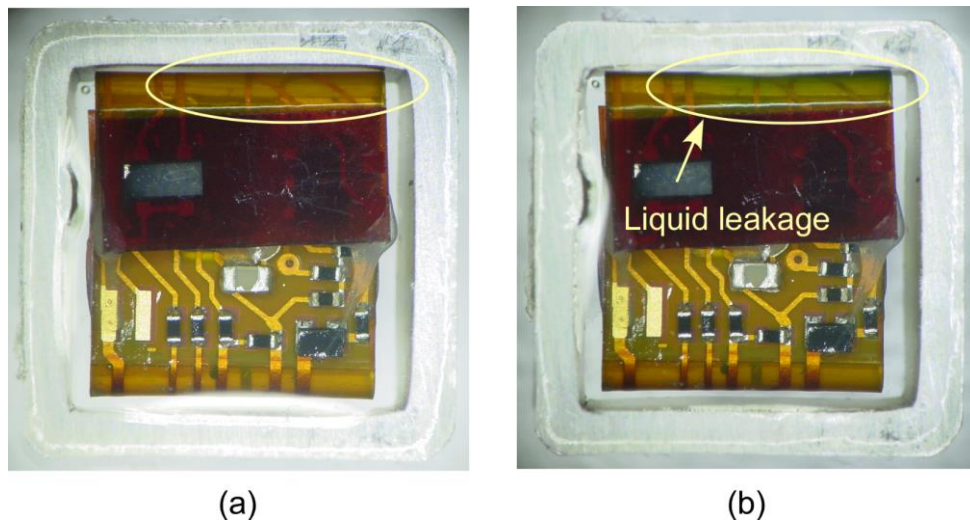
Leakage path in package with PDMS filler at where ELM stack touches tube. Photos of a package with PDMS filler: (a) before any test; (b) after pressurized at 50 MPa for 1 h in DI water with blue dye.
